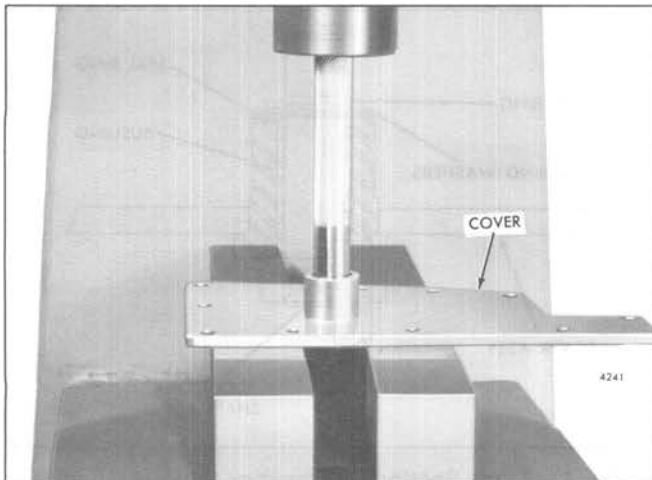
Removing Stop Lever Shaft Bushing from the Governor Cover using Tool J 21967-01
